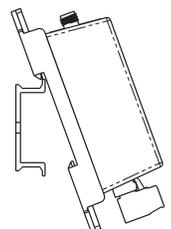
Catch the EZ Mount hook on the edge of the DIN Rail, then rotate into place.
